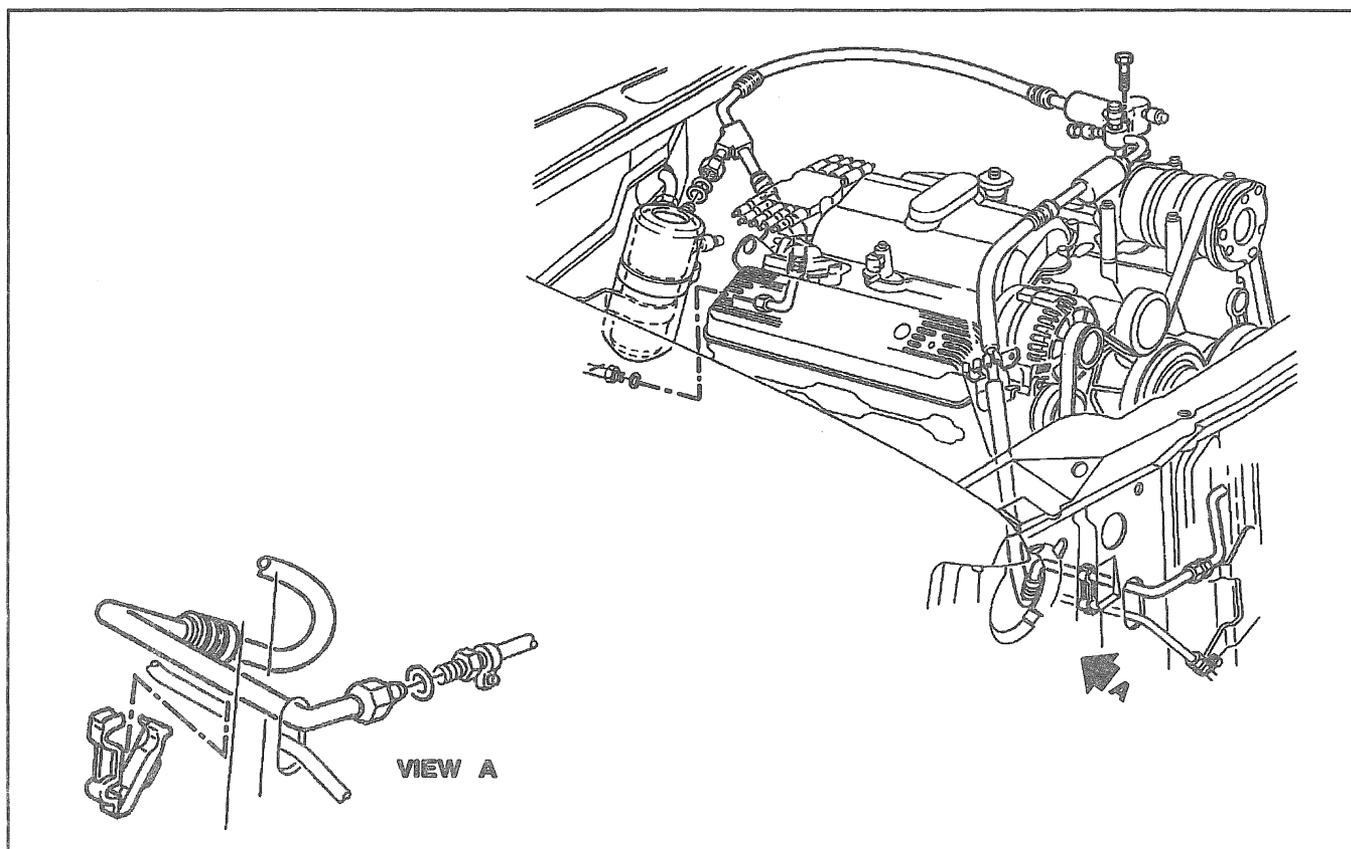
Compressor and Condenser Hose Assembly (5.7L Engines w/Aux. A/C)
